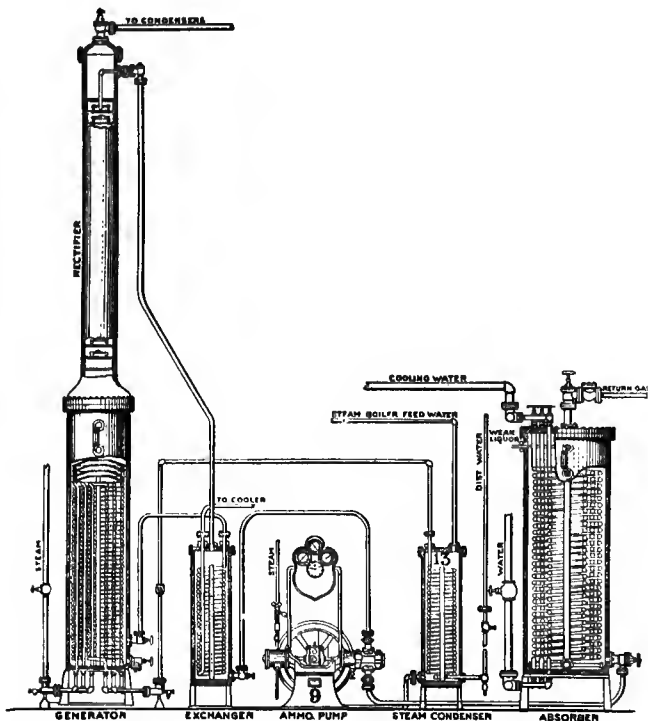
SECTIONAL VIEW OF COLUMBUS ABSORPTION MACHINE.
